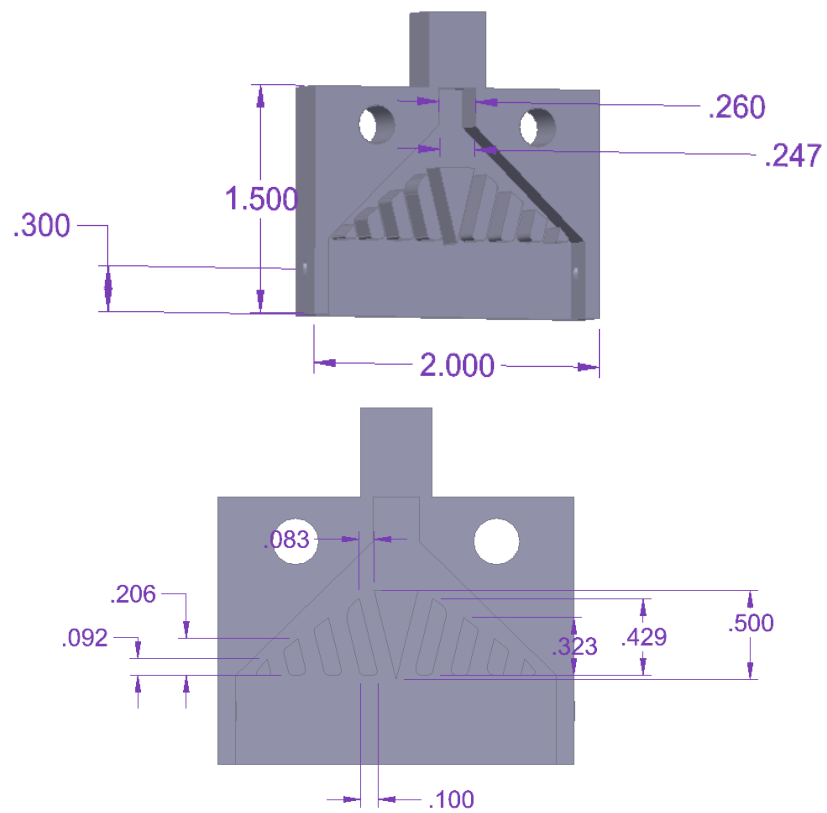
The full schematic of the plasma sheet body is shown. Dimensions are shown in inches.
